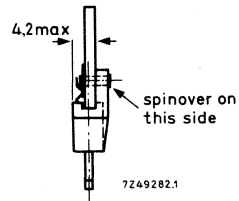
Fixing of the interconnector to the printed-wiring board.
